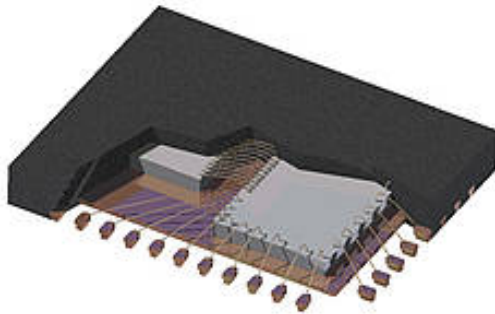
Cross section of the GEM, GEB and hybrid assembly.
